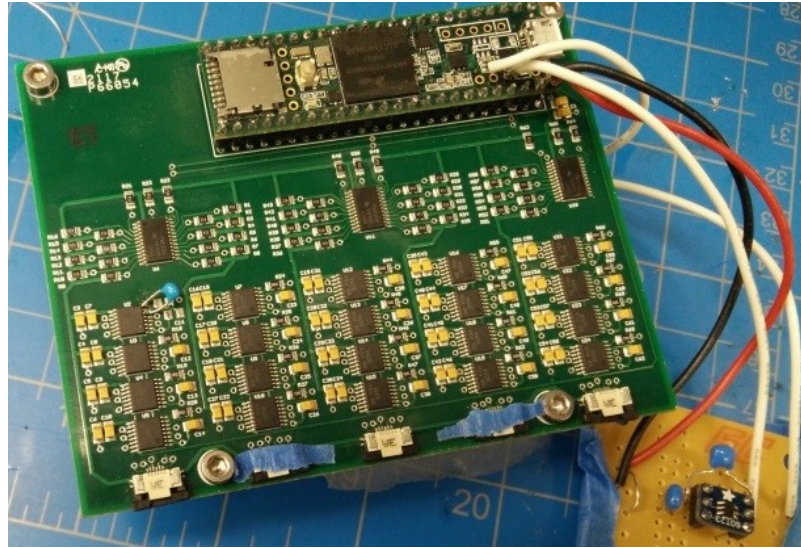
Old DAQ board An early prototype of the PCB board features the Teensy, multiplexers, amplifiers, FPC interfaces, and an external voltage regulator.
